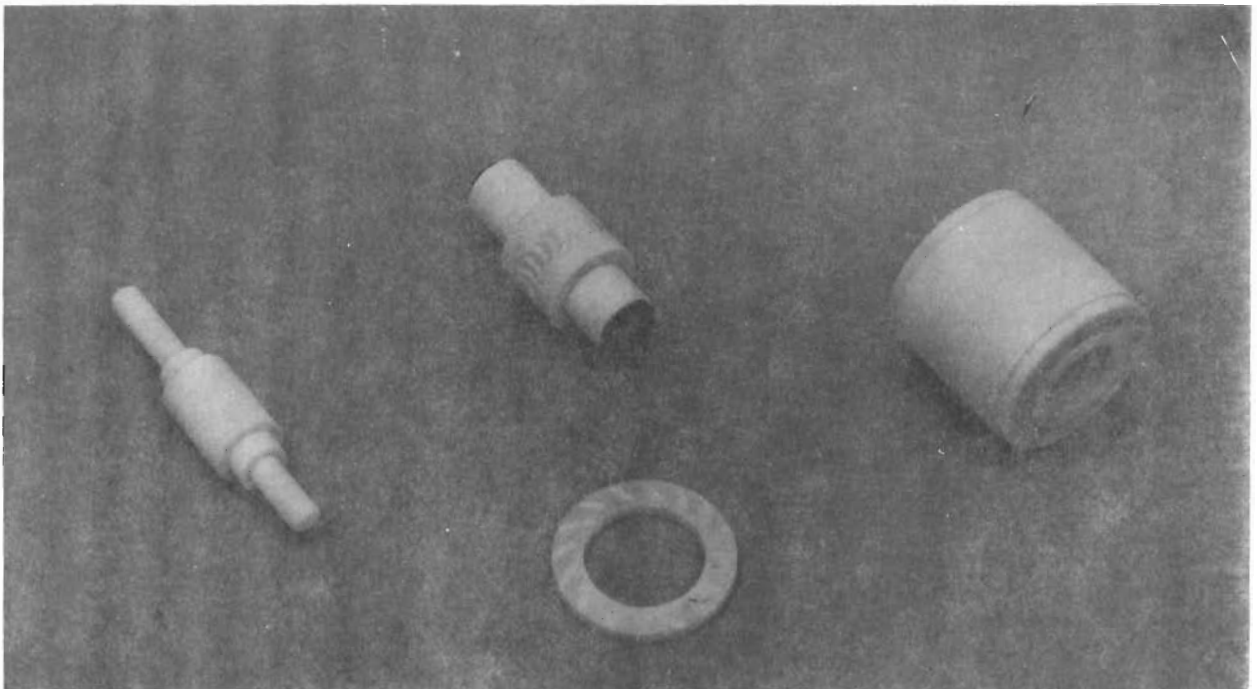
Hydrodynamic Gas Bearing Test Bed Parts
